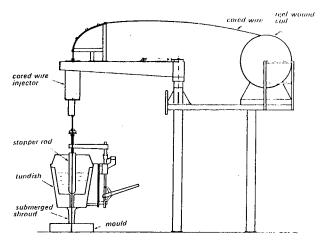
CSM cored wire feeding machine via the tundish stopper rod
